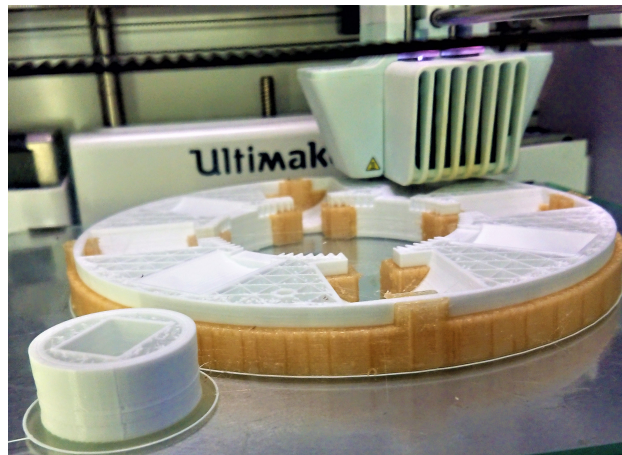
3D-Print Solenoid Housing and Solenoid capsule
